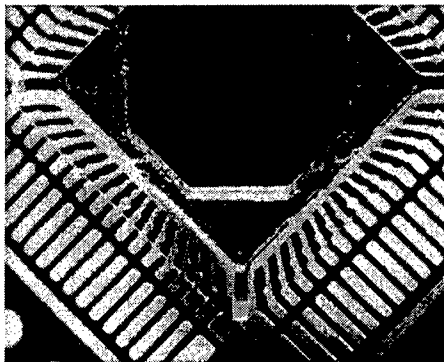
Laser welding examples from electronic industry (laser welded lead frame)
